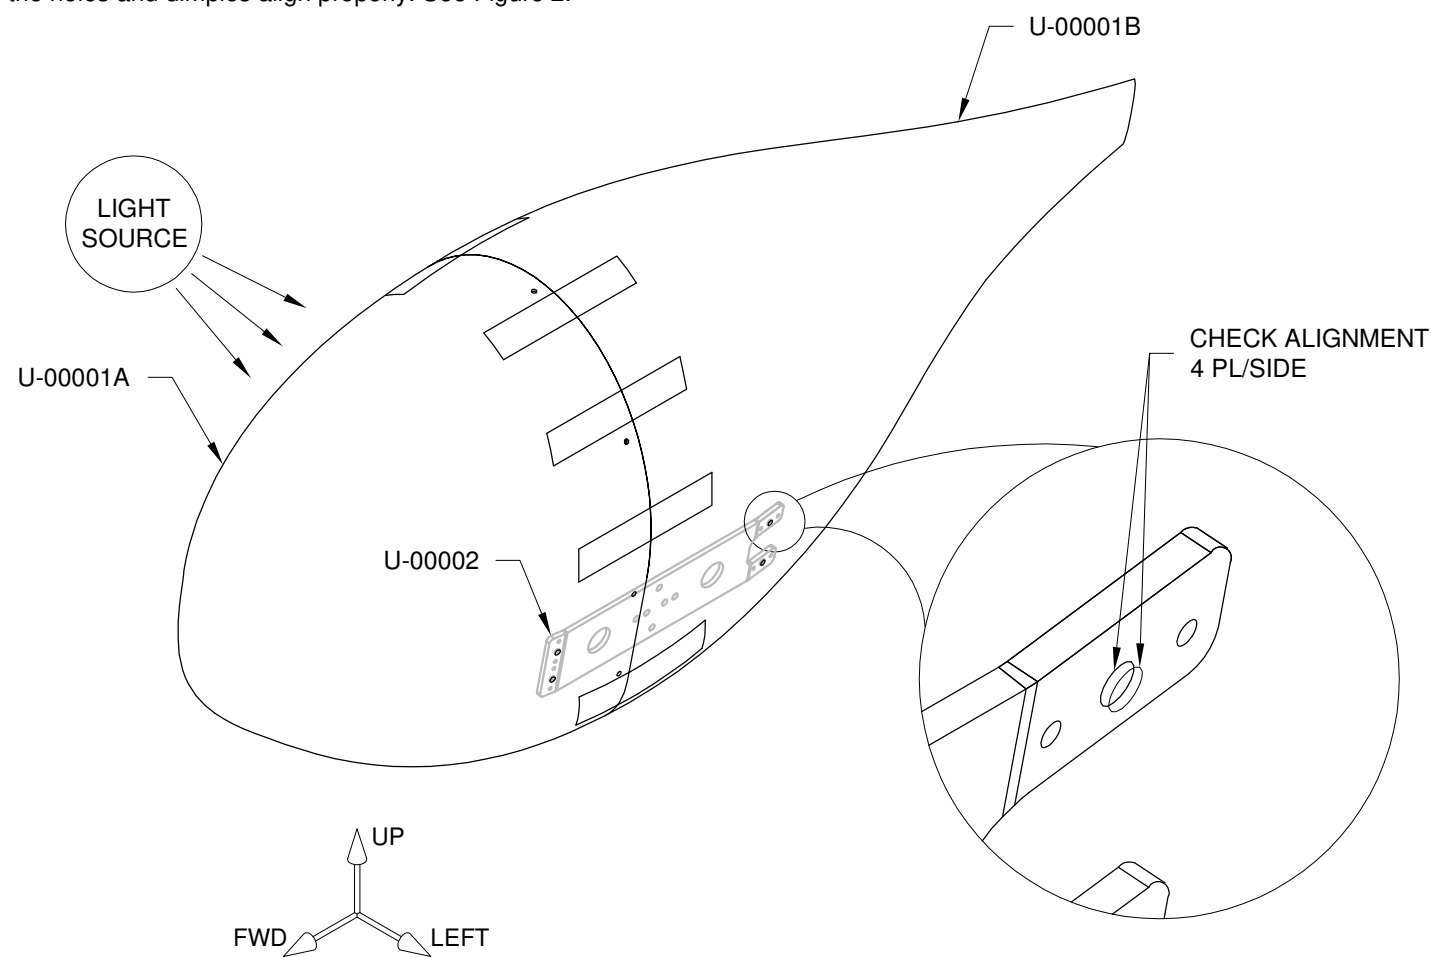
ALIGNING THE WHEEL FAIRING HALVES
